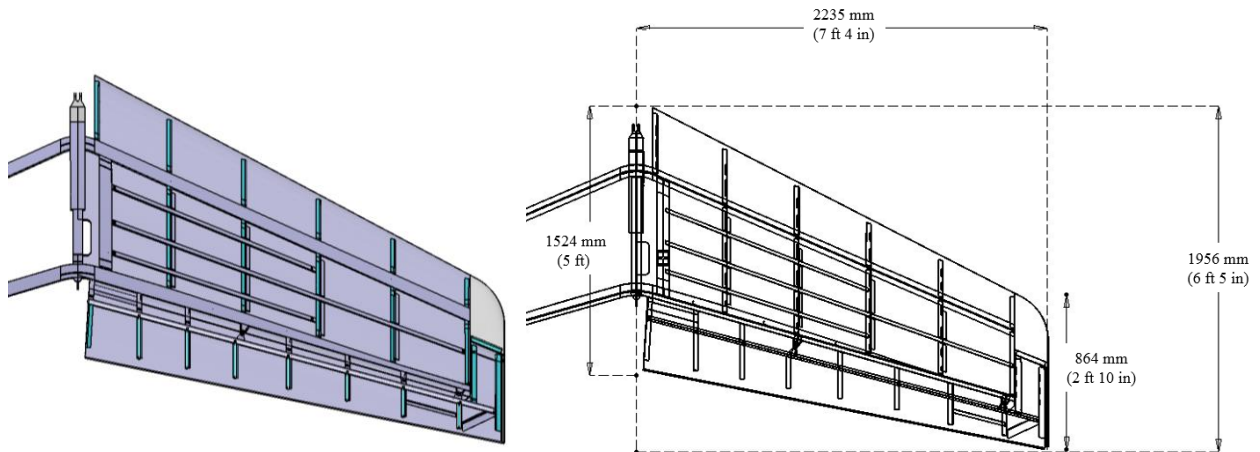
Business jet horizontal stabilizer CAD model and dimensions
